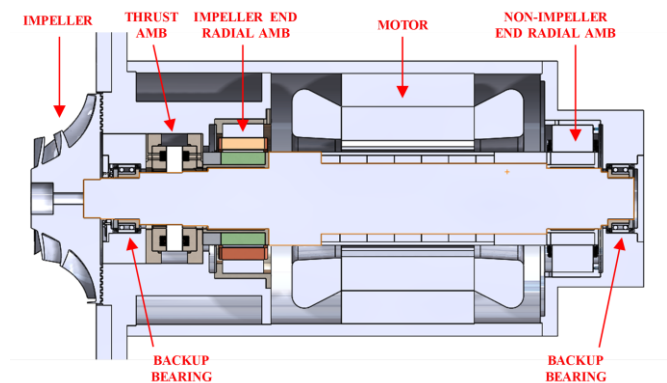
Schematic Design Drawing of High Speed Motor-Compressor Geometry
